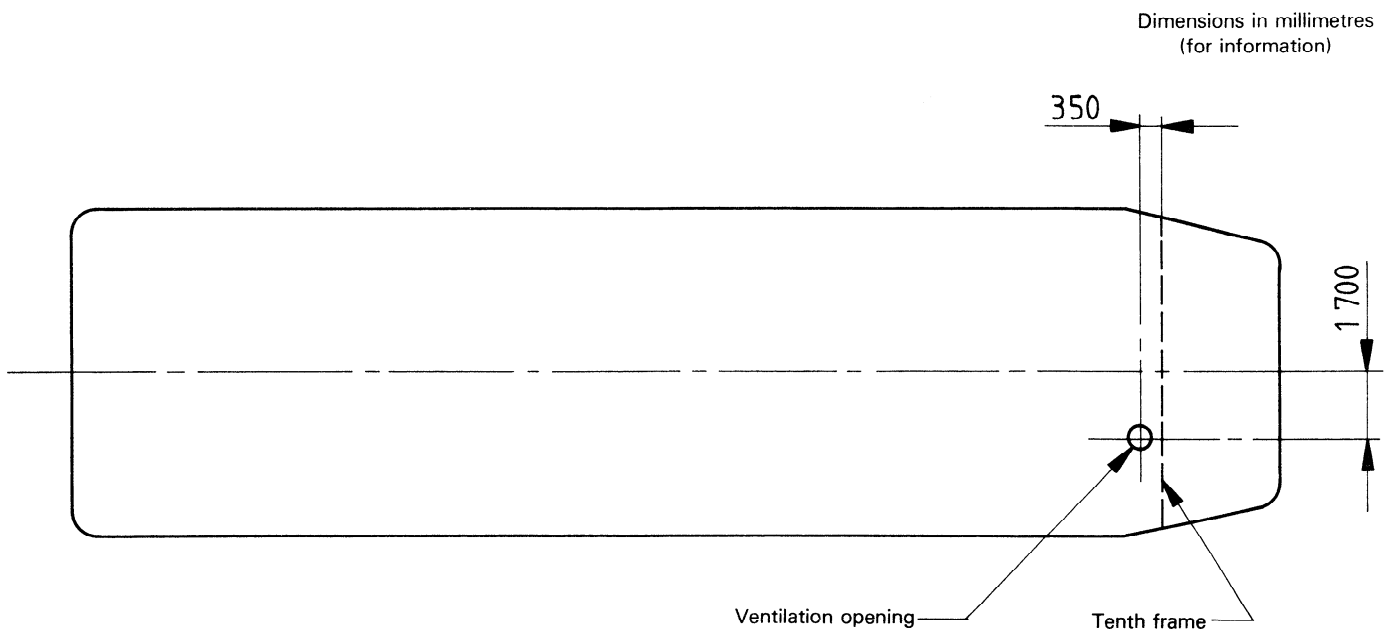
Arrangement of the ventilation opening of shipborne barges, series 3
